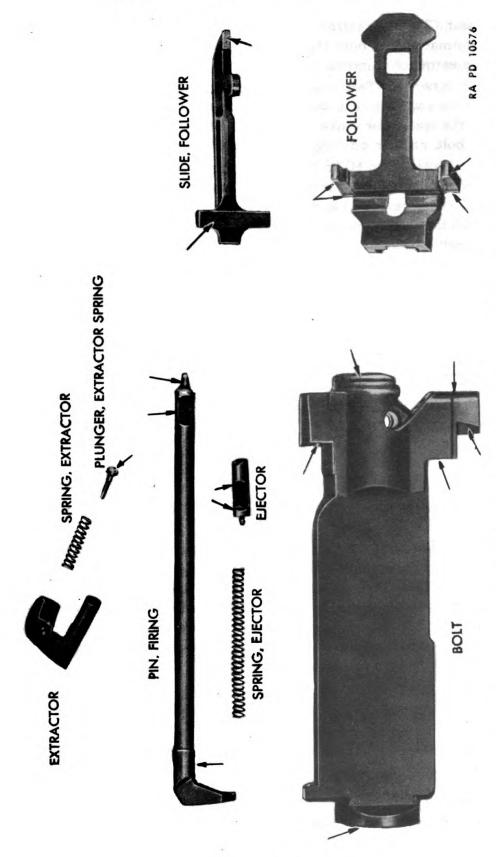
Follower and Follower Slide, Firing Pin, and Bolt Assembly Showing Important Points to be Inspected
